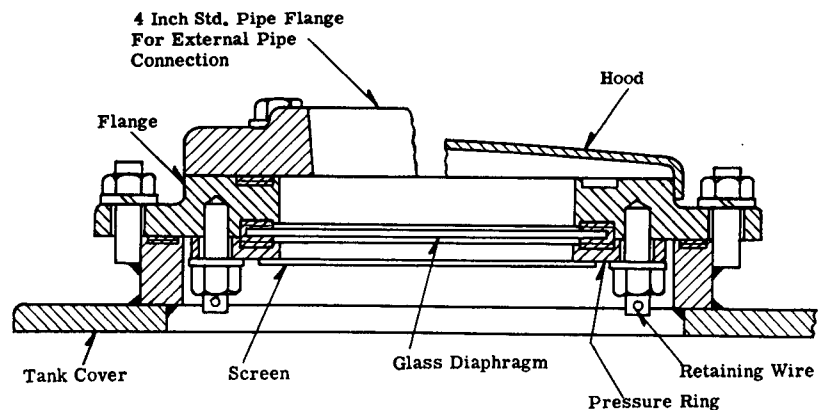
WESTINGHOUSE PRESSURE RELIEF DEVICE—SECTIONAL VIEW
